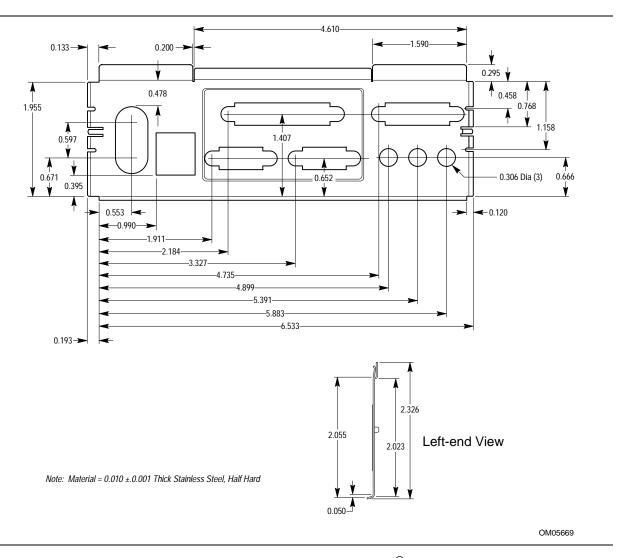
Back Panel I/O Shield Dimensions (Intel® ATX/microATX Chassis)
